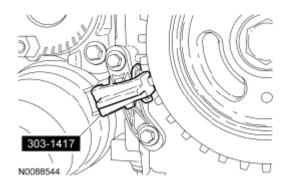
Locating CKP Sensor And Bolts Courtesy of FORD MOTOR CO.
